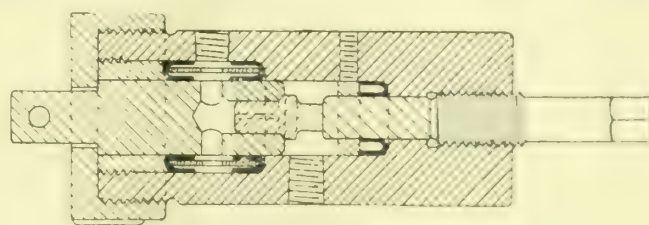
SECTION THROUGH HYDRAULIC VALVE
